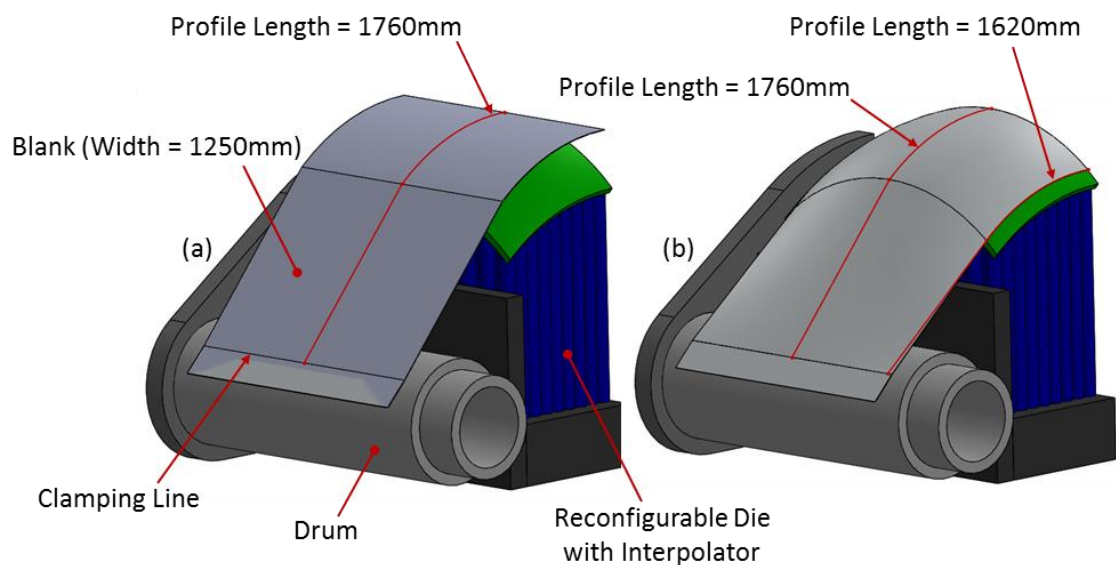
Irregular strain present when a double curvature part is formed with the blank gripped in a straight clamping line over a cylindrical drum
